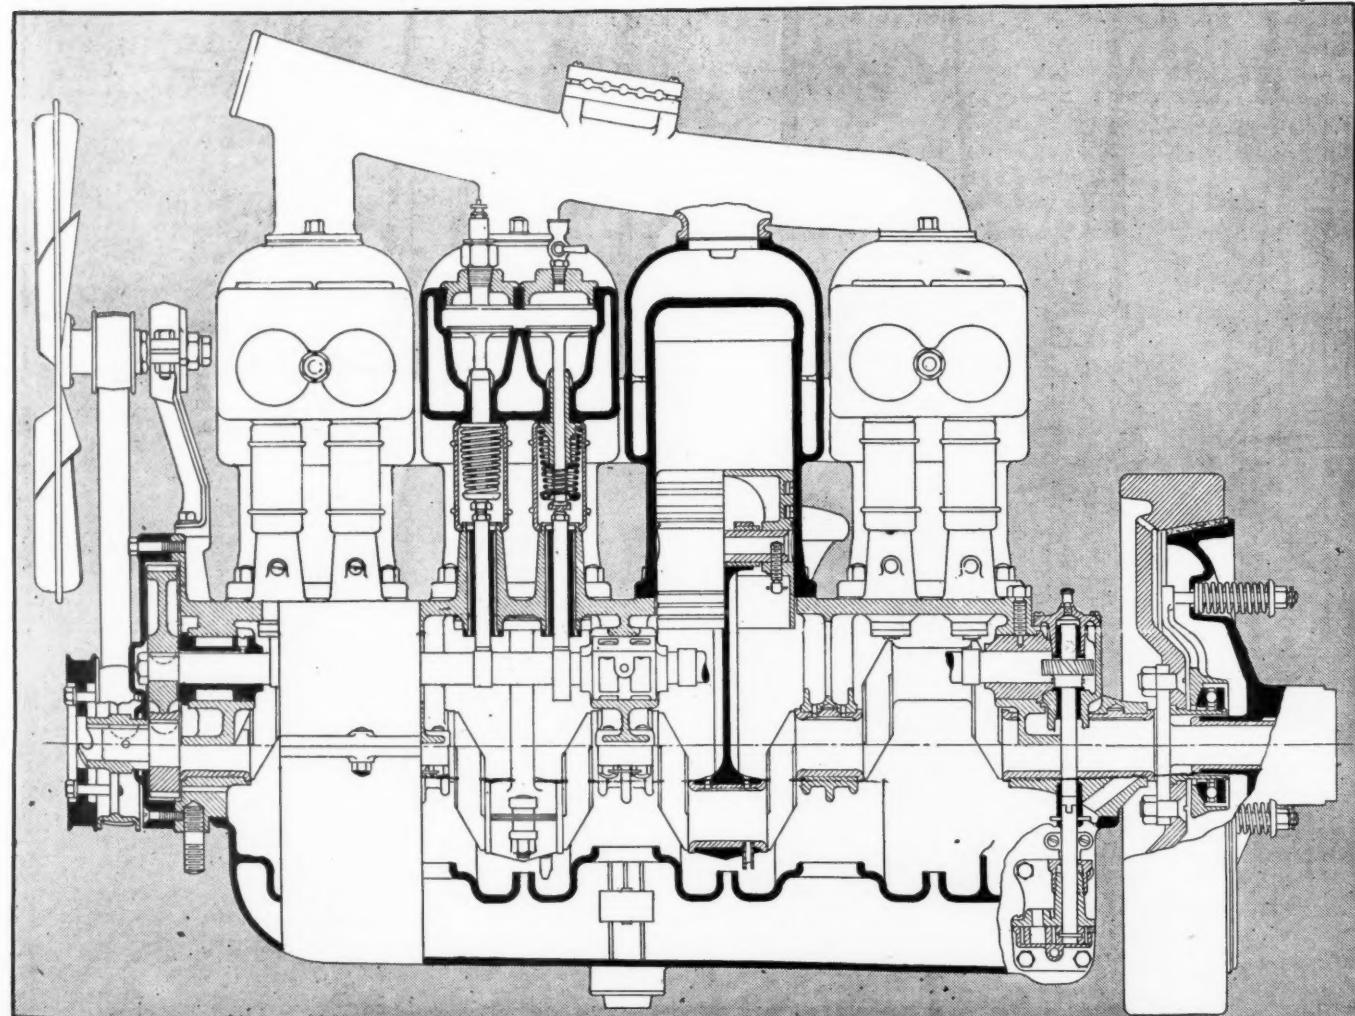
Side part sectional view of the motor of Overland model 71, showing single-cylinder castings
